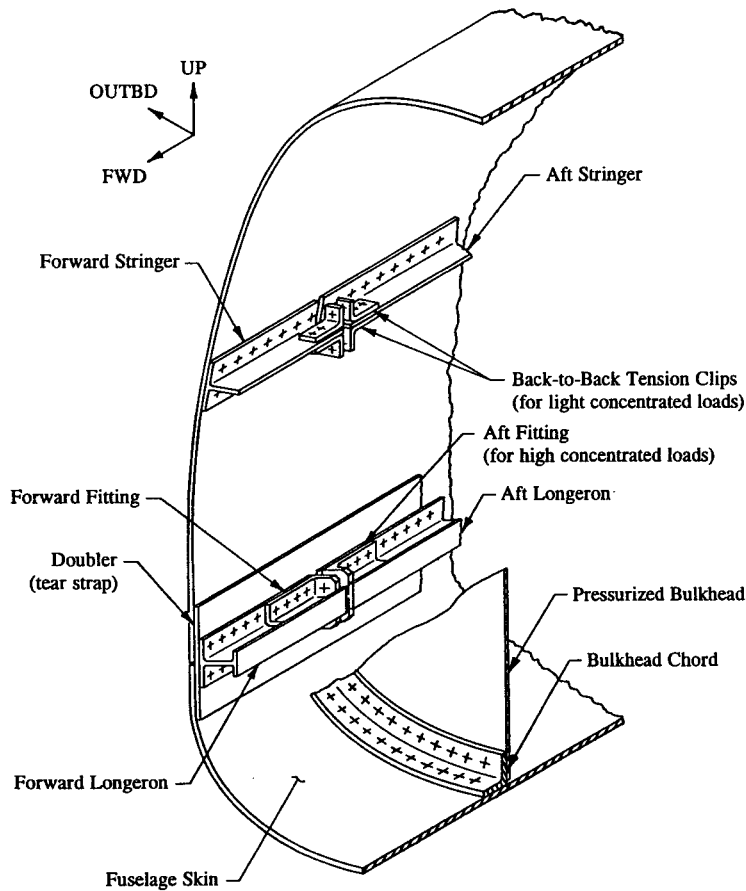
Diagram shows back-to-back tension clips and angle fittings used to splice members across a pressure bulkhead (simplified structure shown).
